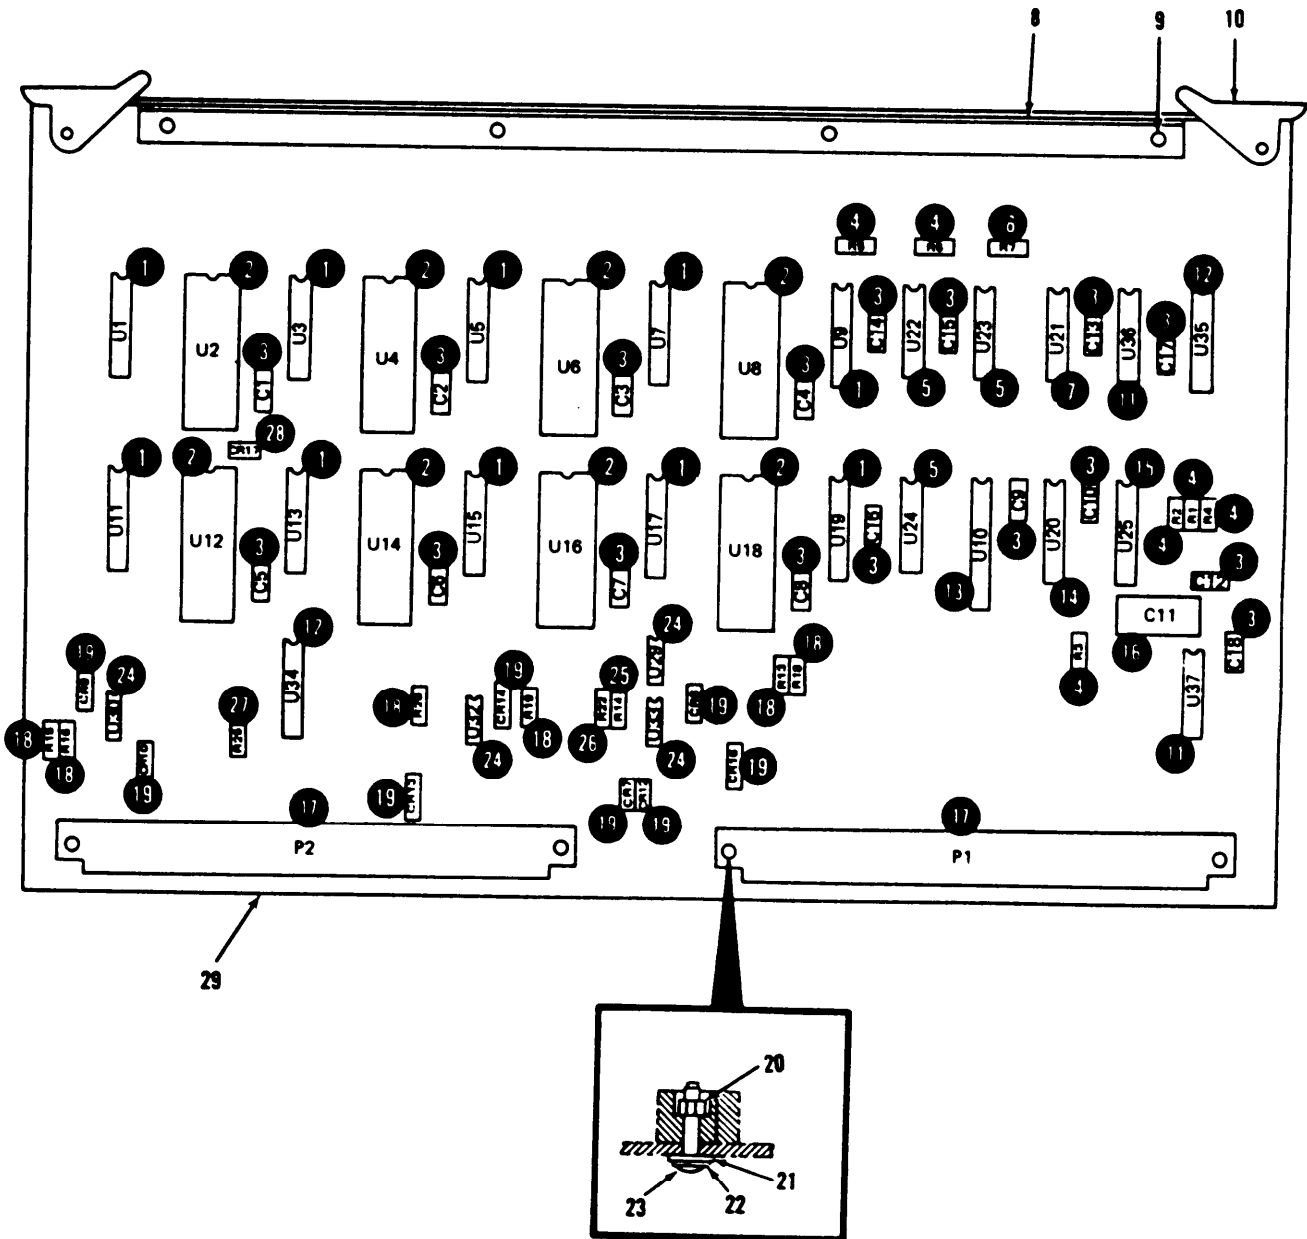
PANEL INTERFACE CIRCUIT CARD ASSEMBLY A3
